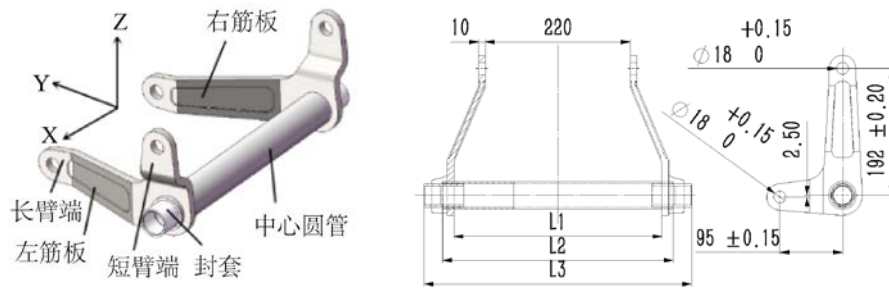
Schematic diagram of machining coordinate system of series porous weldment and drilling machine
